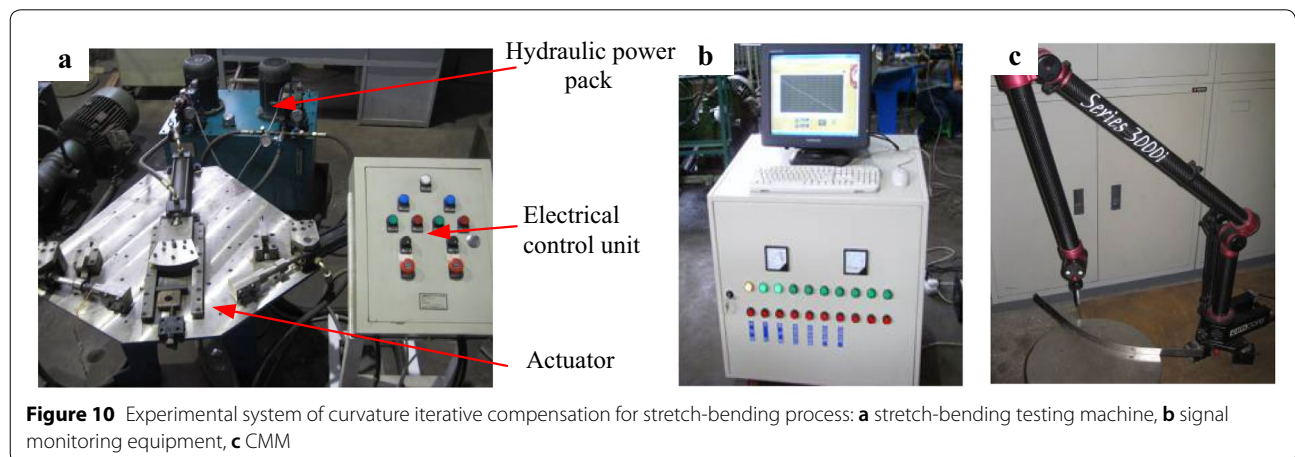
Experimental system of curvature iterative compensation for stretch-bending process: a stretch-bending testing machine, b signal monitoring equipment, c CMM
